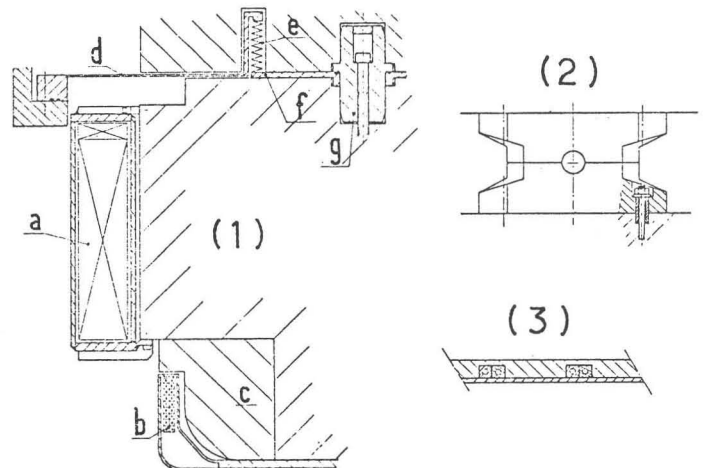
(1) View of the pole showing (a) main coil; (b) trim coils; (c) side shim; (d) skin; (e) bellows; (f) plate; (g) vertical pin; (2) the front spacer with horizontal pin; (3) conductors of trim coils in their casing.
